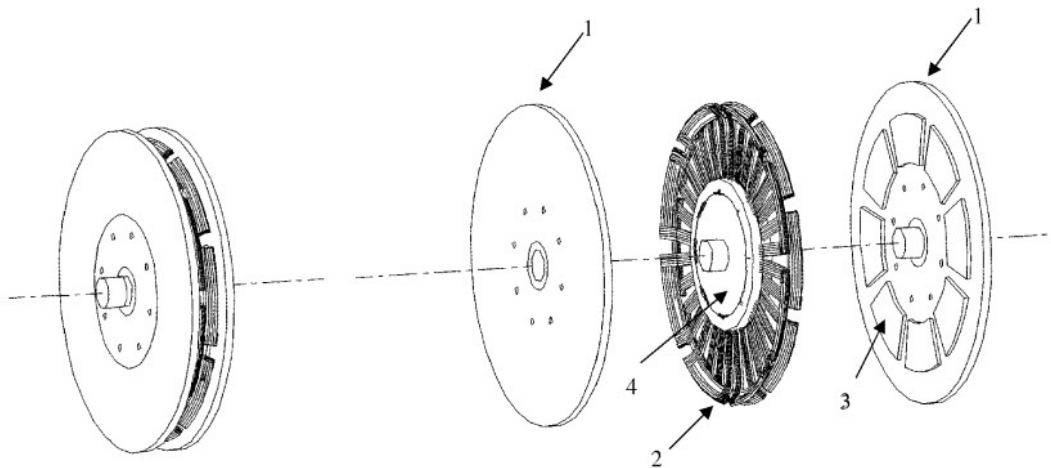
Exploded view of an AFPM machine: 1 — rotor disc, 2 — stator winding, 3 — PM, and 4 — epoxy core. Source: [61]
